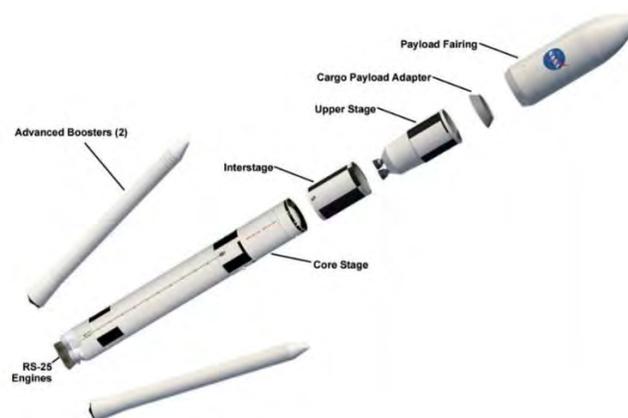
Space Launch System Block 2 Exploded View
